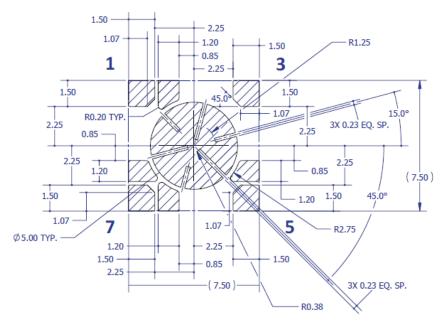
Recommended solder pad layout for anode, cathode, and thermal pad.
